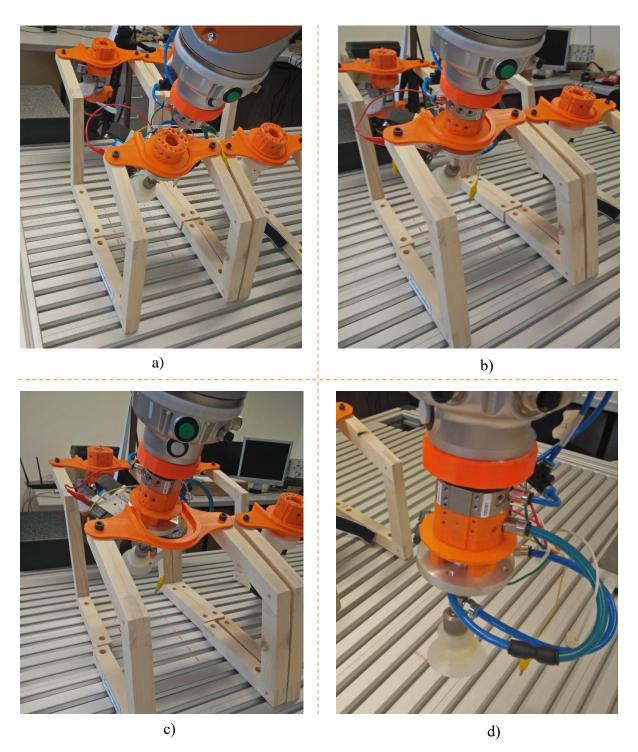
Sequence of tool grabbing; a) The Robotic arm moves toward the tool; b) The connection between both sides of the ATC; c) Path made by the robot in order to take the tool out of the tool holder; d) The tool is ready for the task
